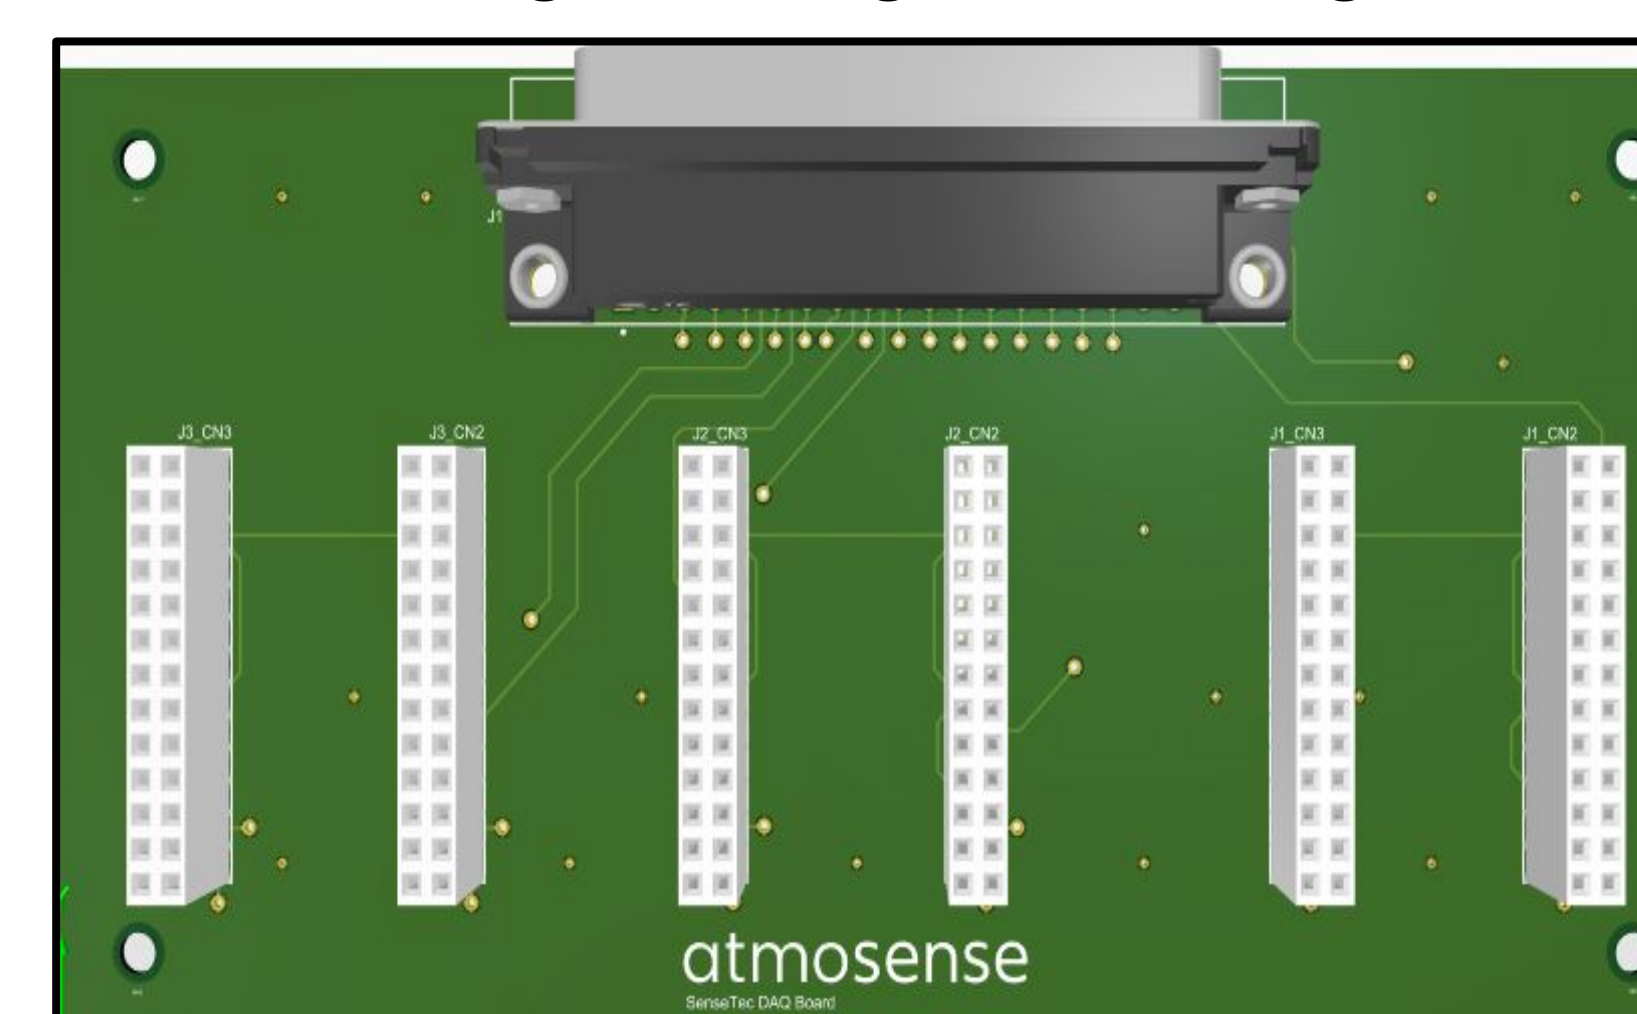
Top View of DAQ Board Designed Using Altium Designer.
